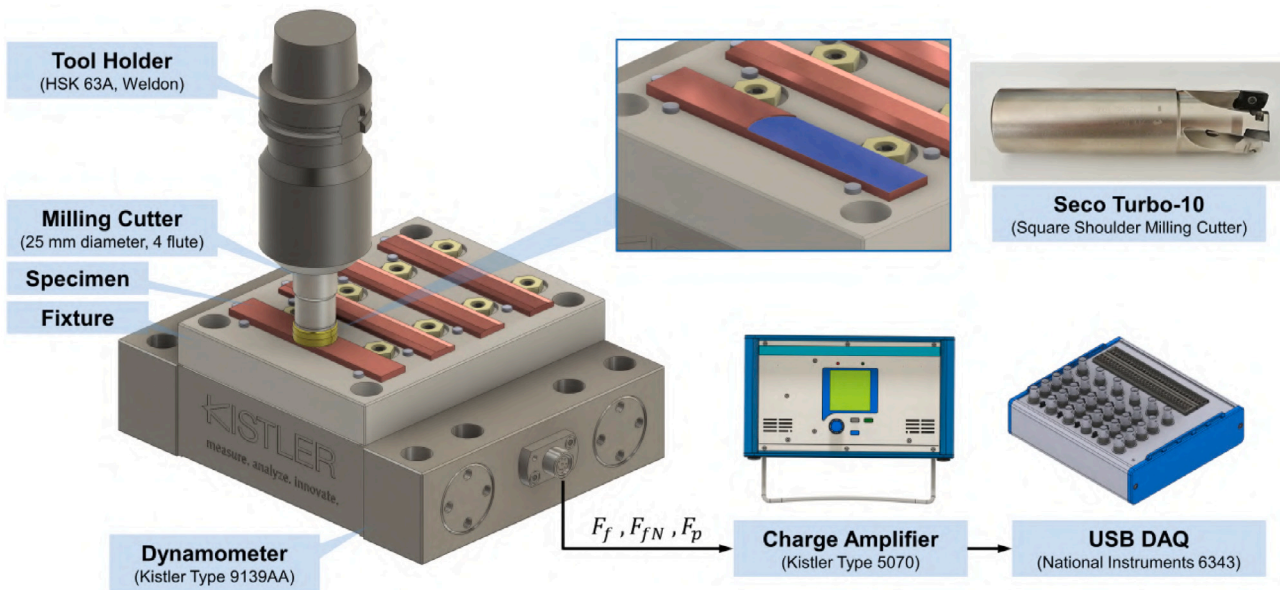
Schematic illustrating the tool, workholding, and cutting force acquisition setup used to generate the fatigue specimen test surfaces.
